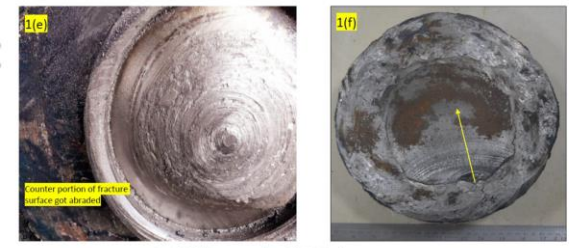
(e)-(f) Fracture surface of failed shaft
